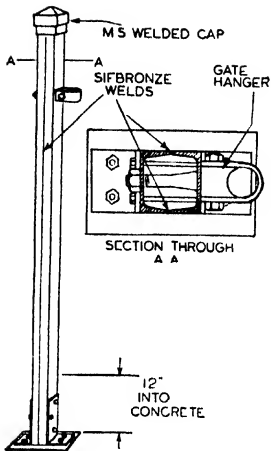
(above).—STEEL GATE-POST 7 T. OVERALL, FABRICATED BY BRONZE WELDING (*Suffolk Iron Foundry (1920), Ltd.*)
